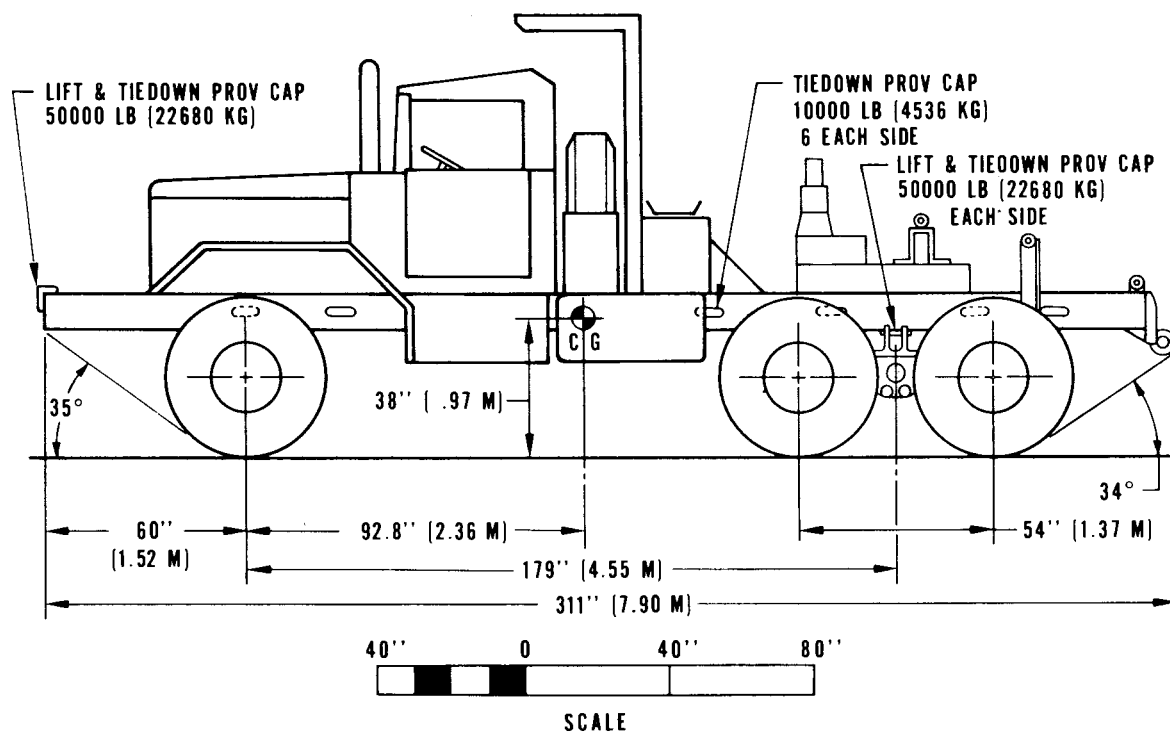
Side elevation, truck, bolster, WWN, M748A1.
